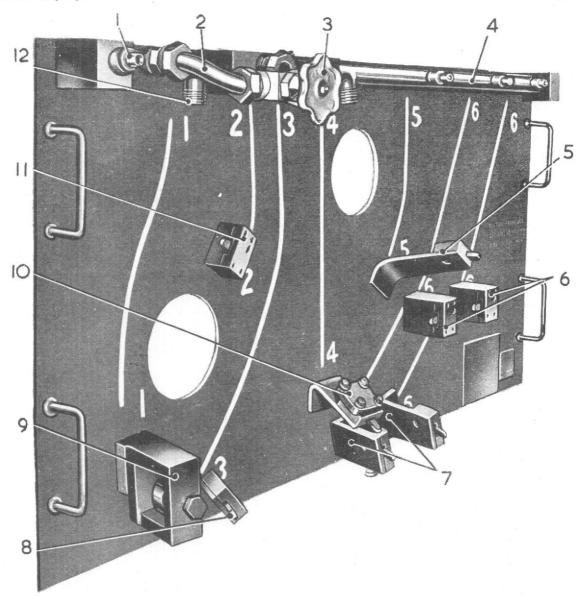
Priming adapter for (48 Mk. I) where mod. 1095 has been embodied, and (48 Mk. 2) rear bearing.
